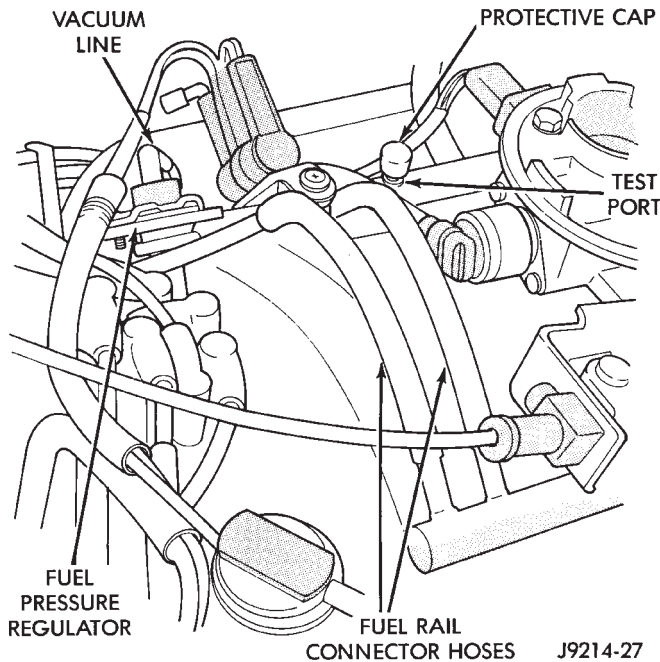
Fuel Pressure Test Port—4.0L Engine
